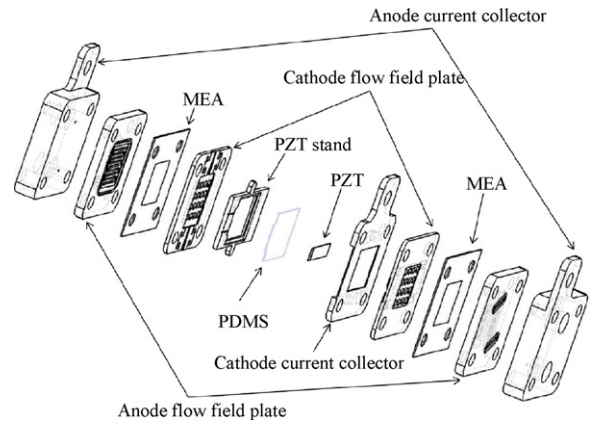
An exploded drawing of the PZT-PEMFC bi-cell.
